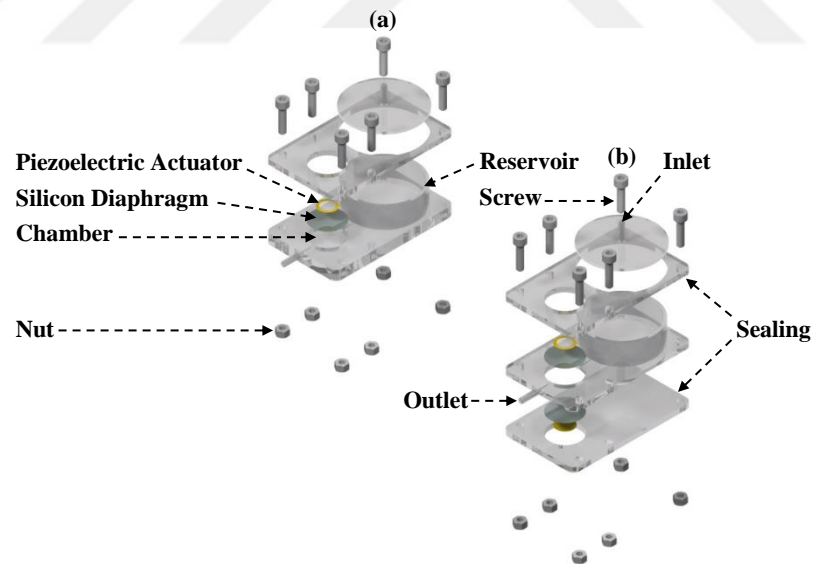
Exploded view of the micro-pumps, (a) SDM, (b) BDM
